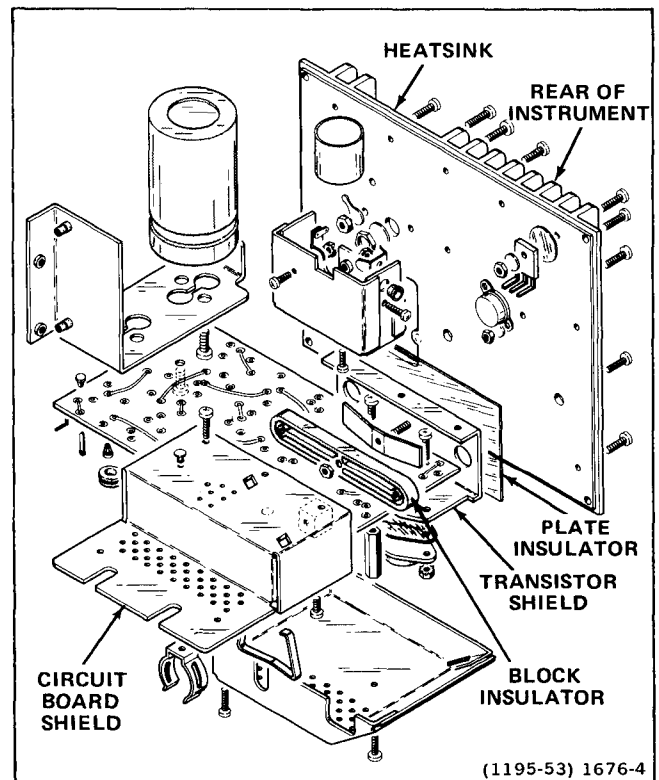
Exploded-view drawing of a portion of the power unit identifying several critical parts.
